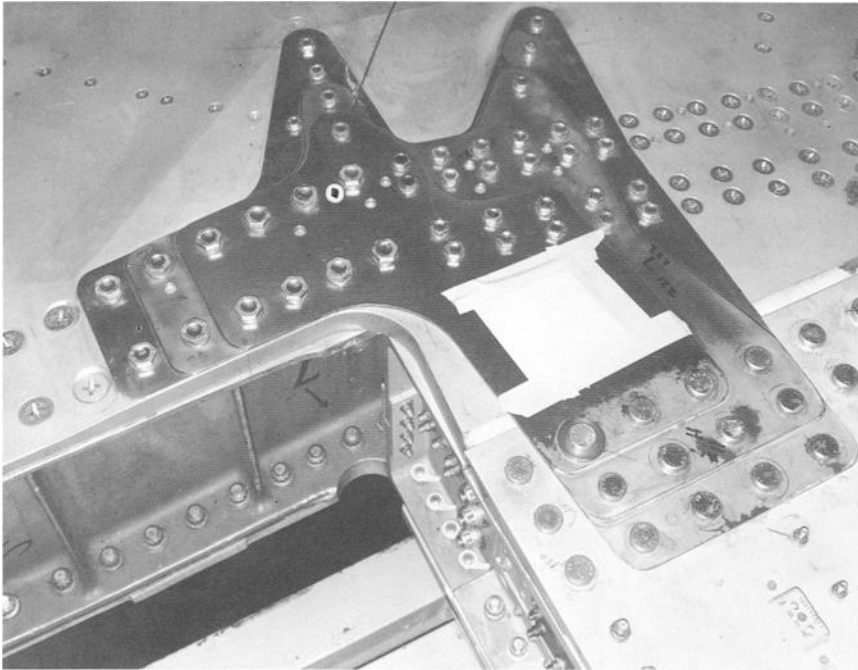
Reinforcing doubler lower skin wing outer panel wing root fillet.
